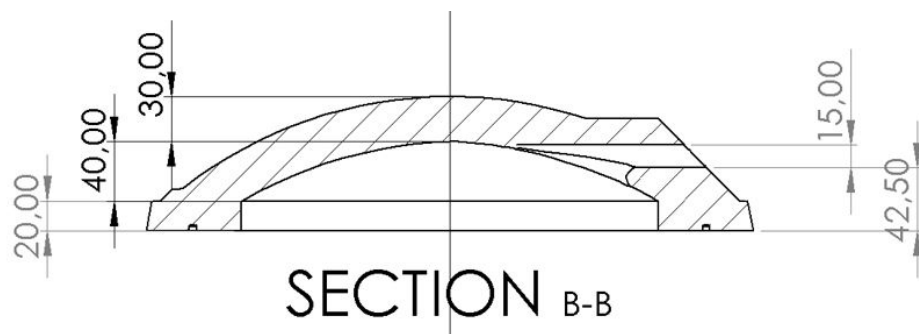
Cross-section view drawings of the dome design (cross-section BB of figure B.7.19). Dimensions in micrometres [μm].
